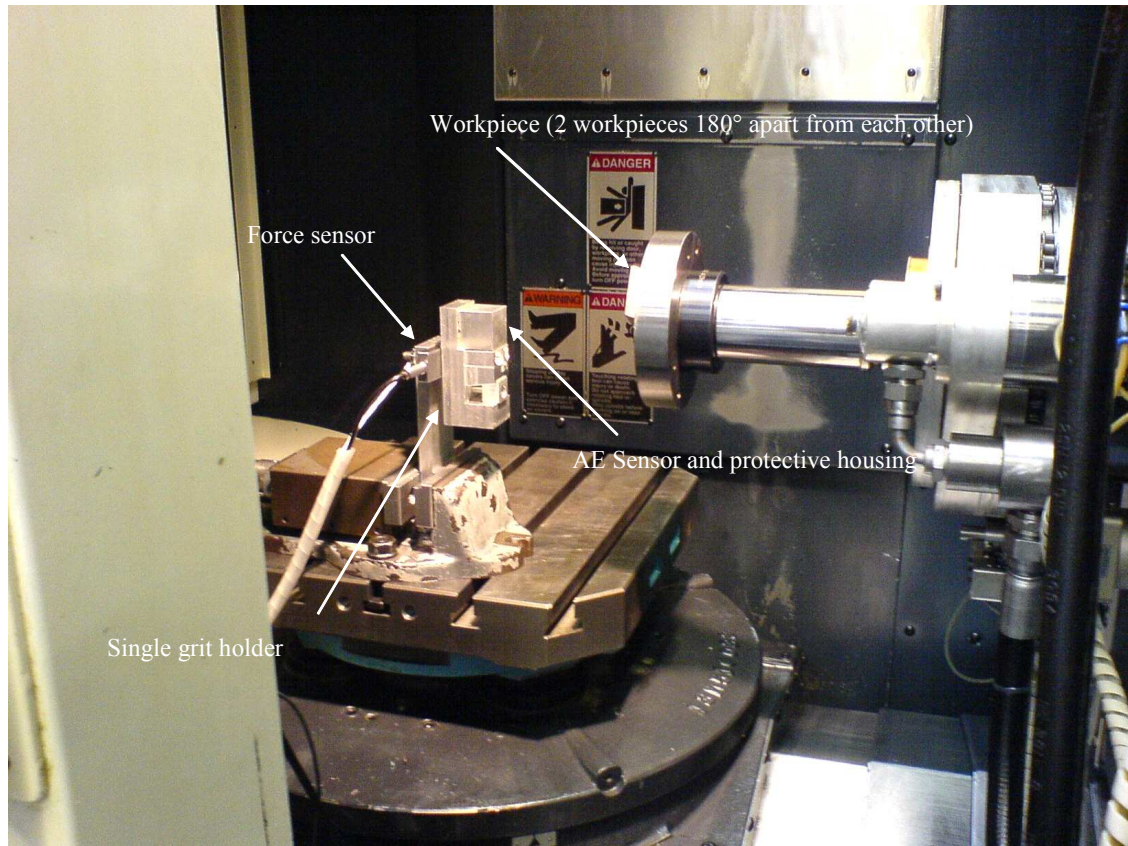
Makino A55 grinding centre machine set-up for SG test
